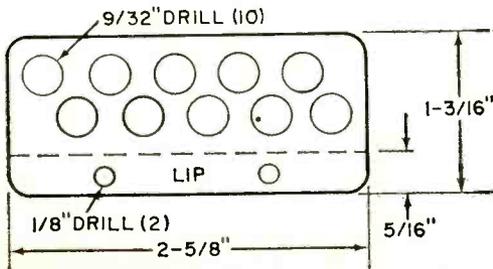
Drilling details for the board. Don't forget to include the eight insulated wire jumpers.
